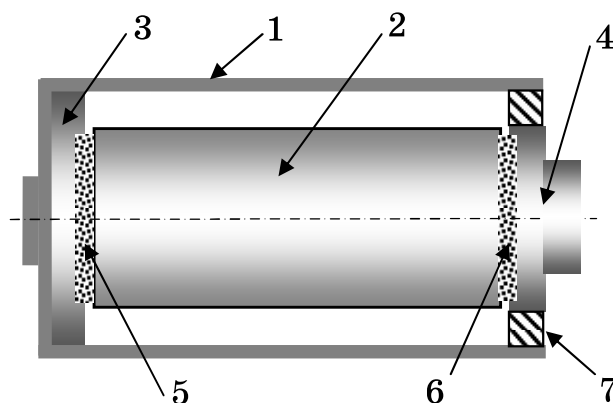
The supercapacitor and its components: 1– aluminum cylindrical case; 2 – roll of the charge storing device (CSD); 3 – anode collector galvanically connected to the case; 4 – cathode collector; 5,6 – place of welding the anode and cathode collectors with electrodes of the CSD; 7 – insulating ring
